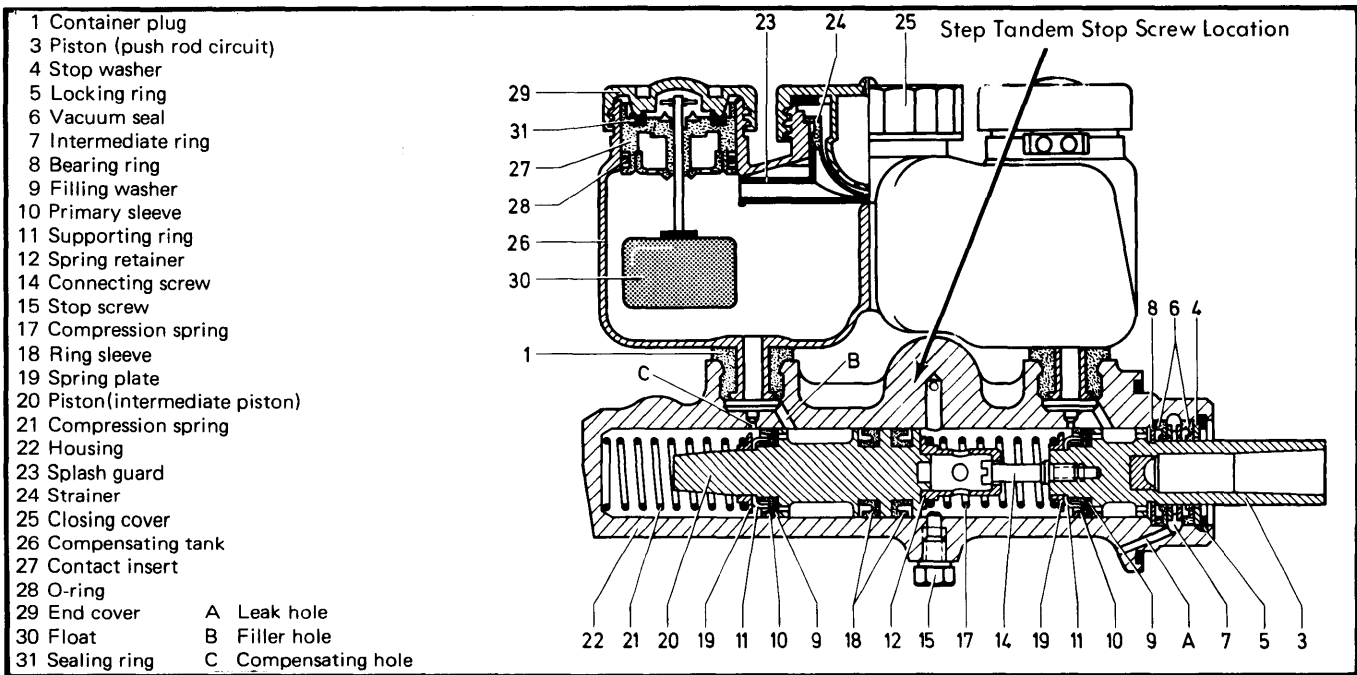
Sectional View of Late Model Mercedes-Benz Tandem Master Cylinder
